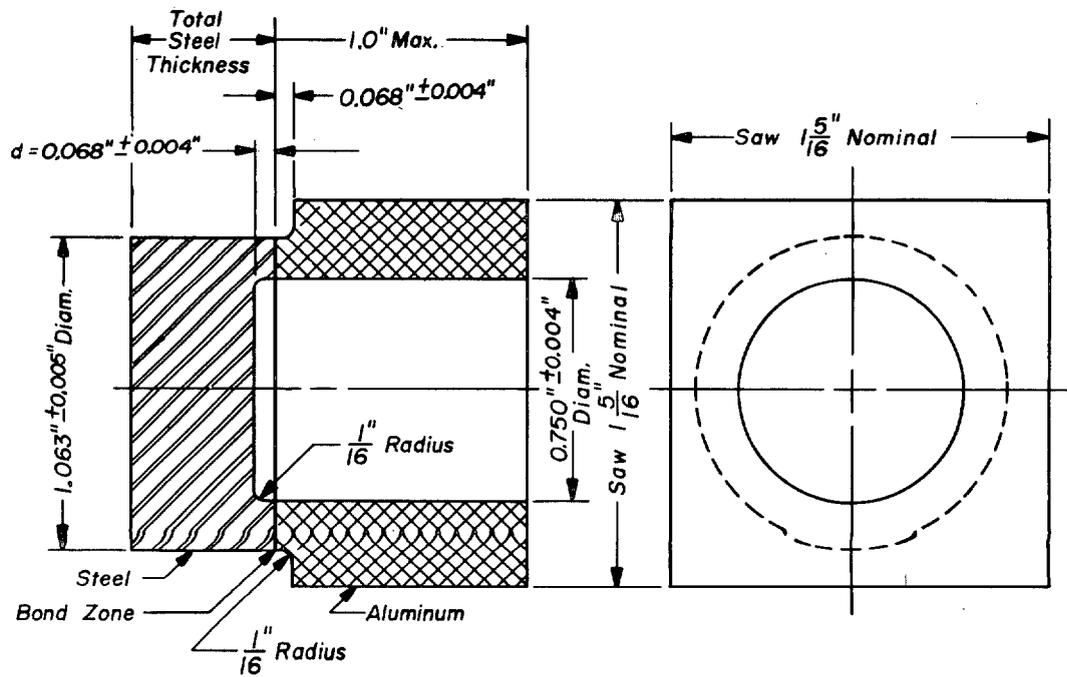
Sketch of ram tensile. (Specimen and fixture for testing bond zone tensile strength.)
